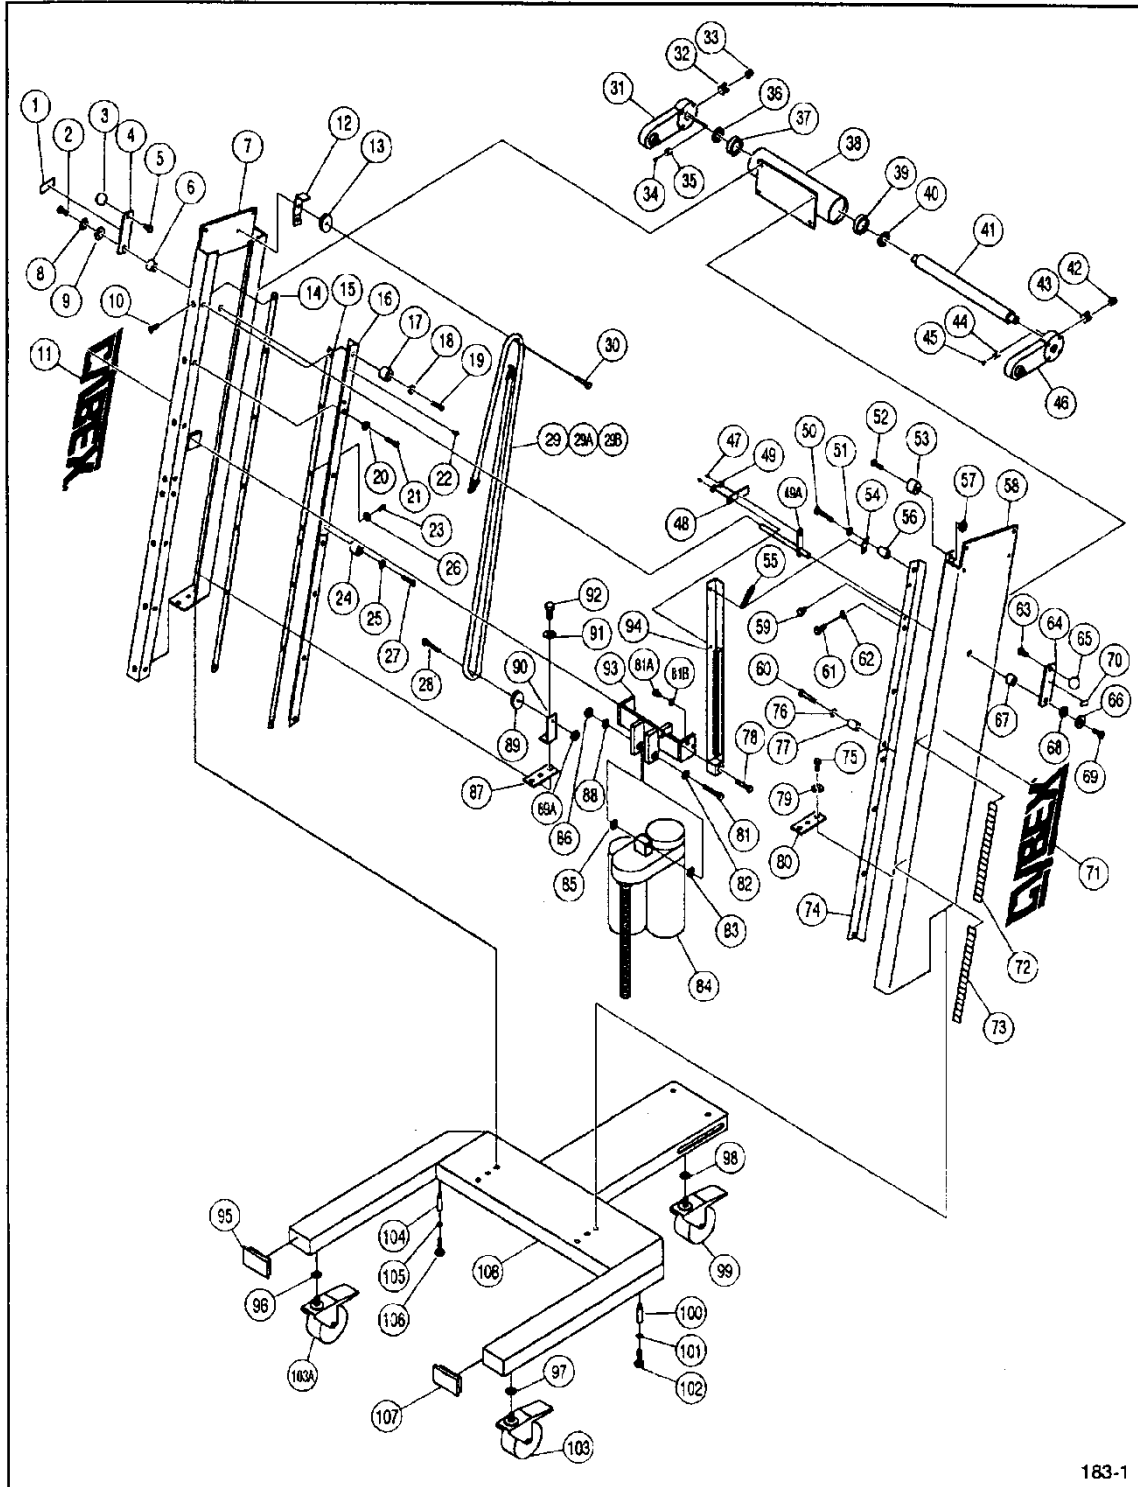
Base Frame Actuator, and Countershaft Assemblies.
